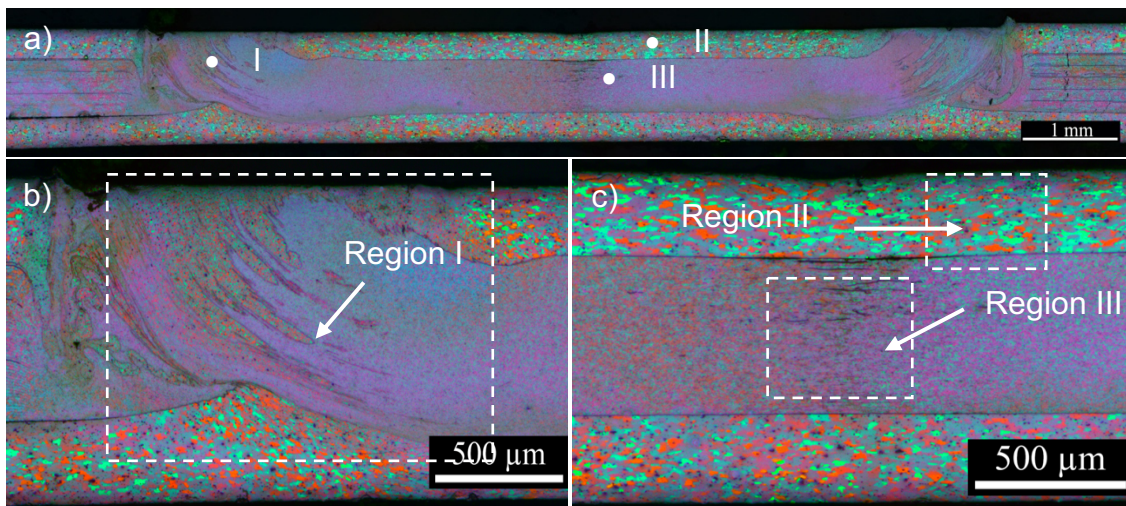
(a) cross-section of multilayered weld processed with the baseline condition:  $RS=1400$  rpm,  $PS=1.7$  mm/s, and  $PD=0.7$  mm. (b) and (c) represent higher magnifications of the cross-section at the region penetrated by the adjustable shoulder and at the center of the weld, respectively.
